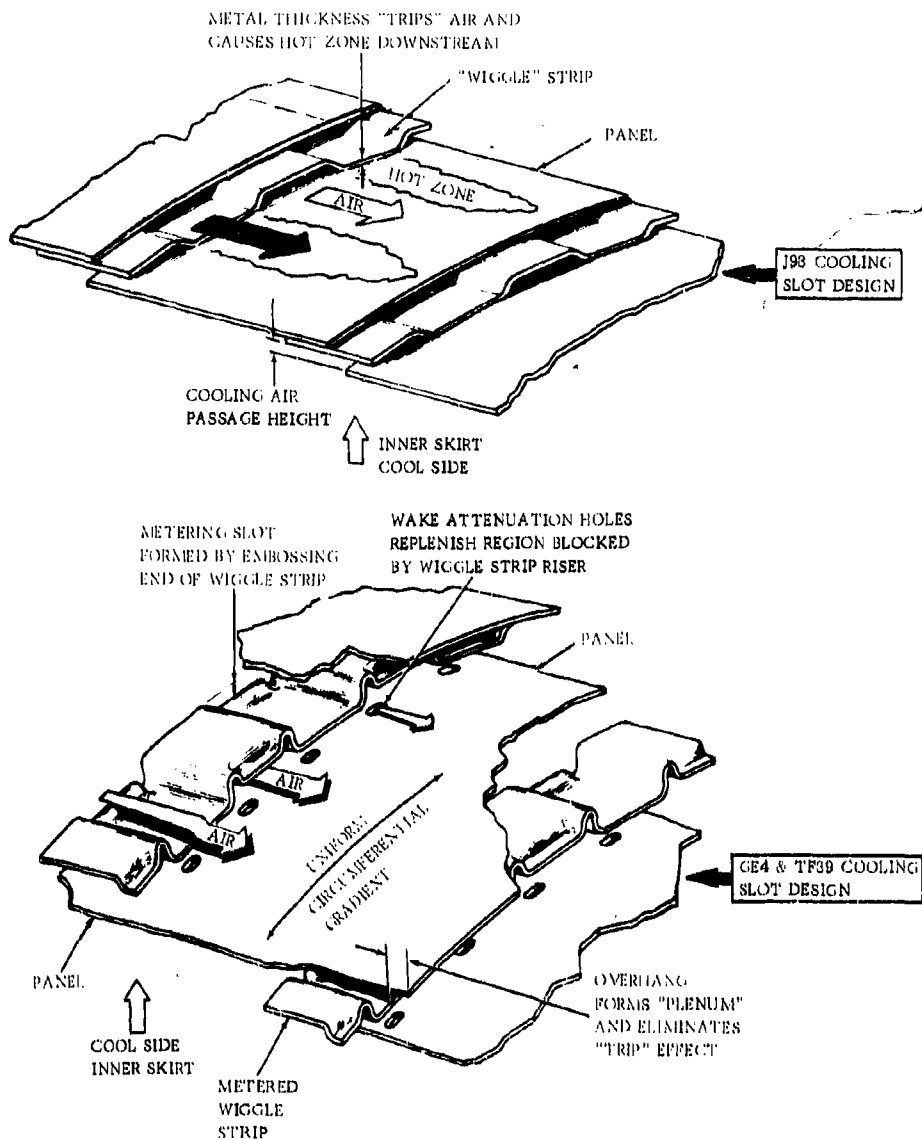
GE4 COMBUSTOR COOLING SLOT DESIGN
